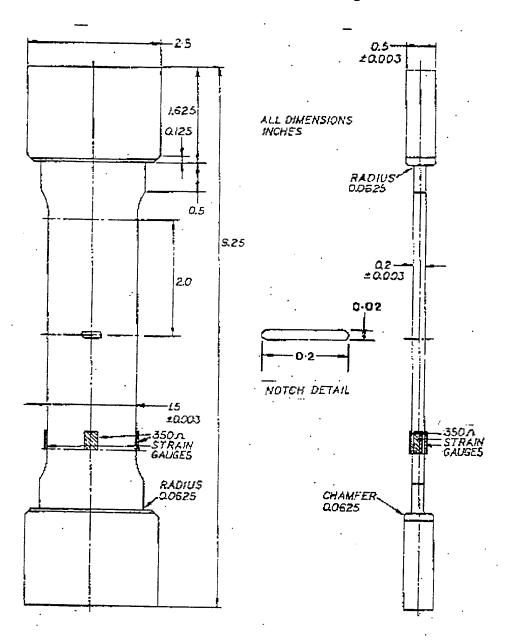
Fixed End Centre Crack 7075-T651 Specimen
